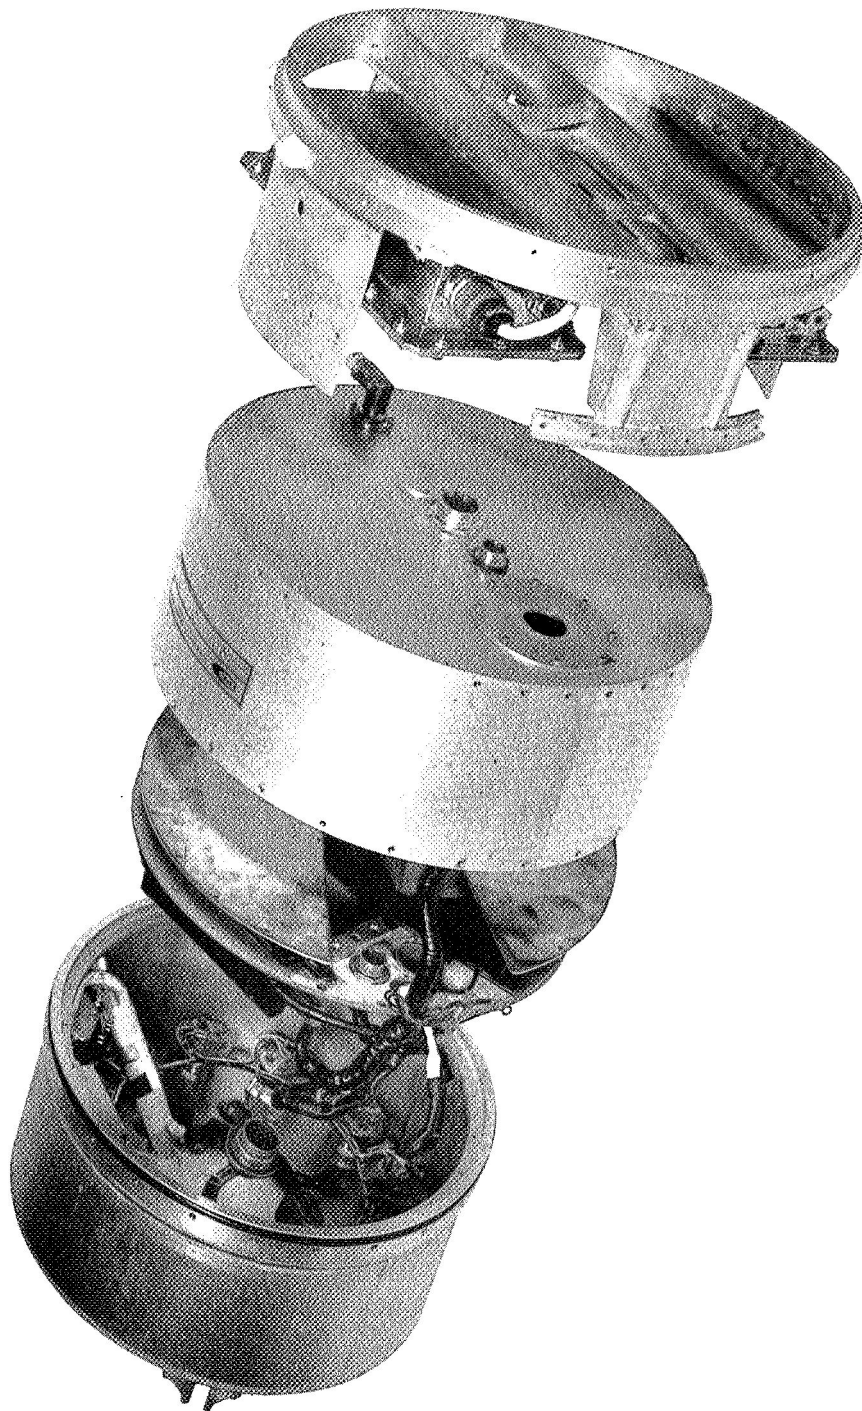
10 keV - 1/2 Ampere Electron Accelerator - Exploded View 2.
